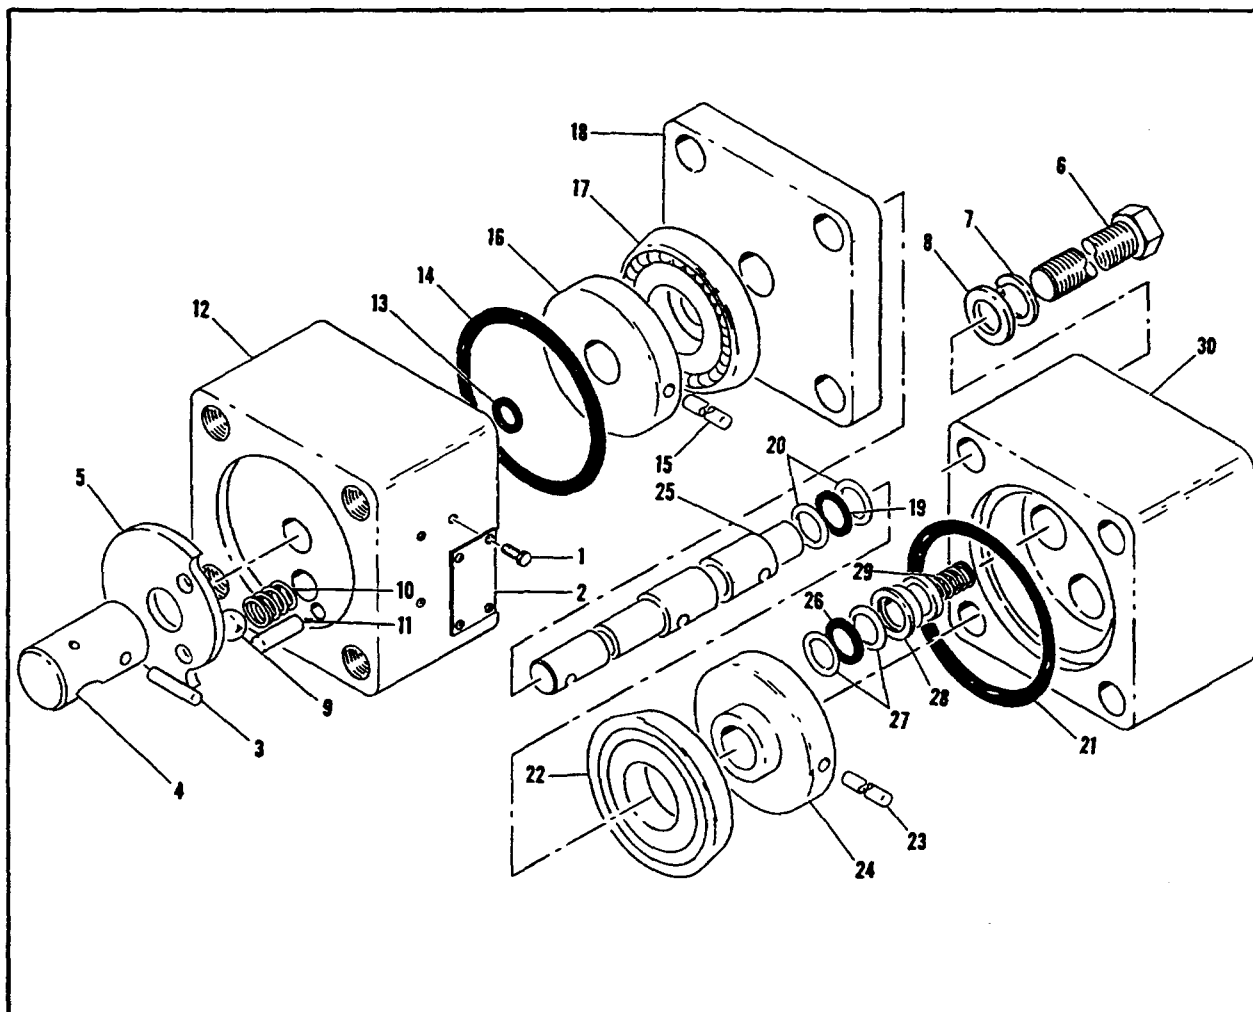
Hand Driven Reciprocating Pump Assembly L. H. & R. H.
